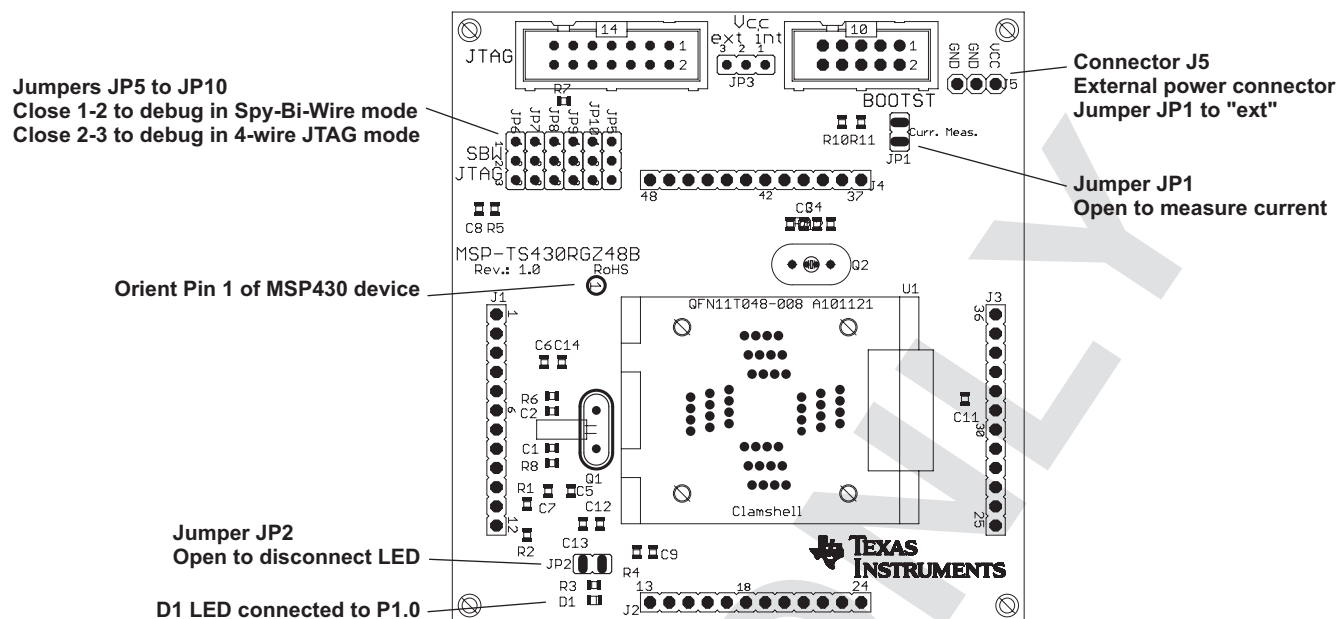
MSP-TS430RGZ48B Target Socket Module, PCB
